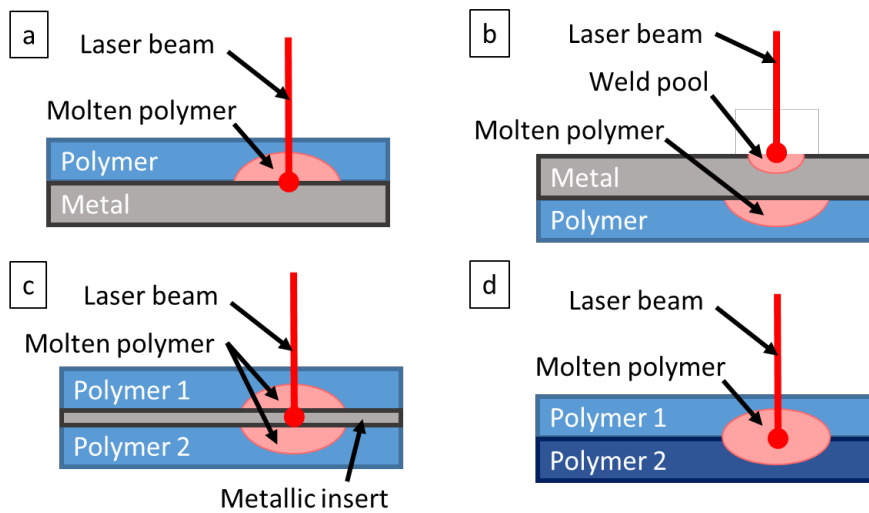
Scheme of the ways to weld polymers: (a) dissimilar direct weld [5], (b) dissimilar indirect weld [70], (c) polymer-polymer weld with insert [67,68], and (d) polymer-polymer weld without insert [67,68].
